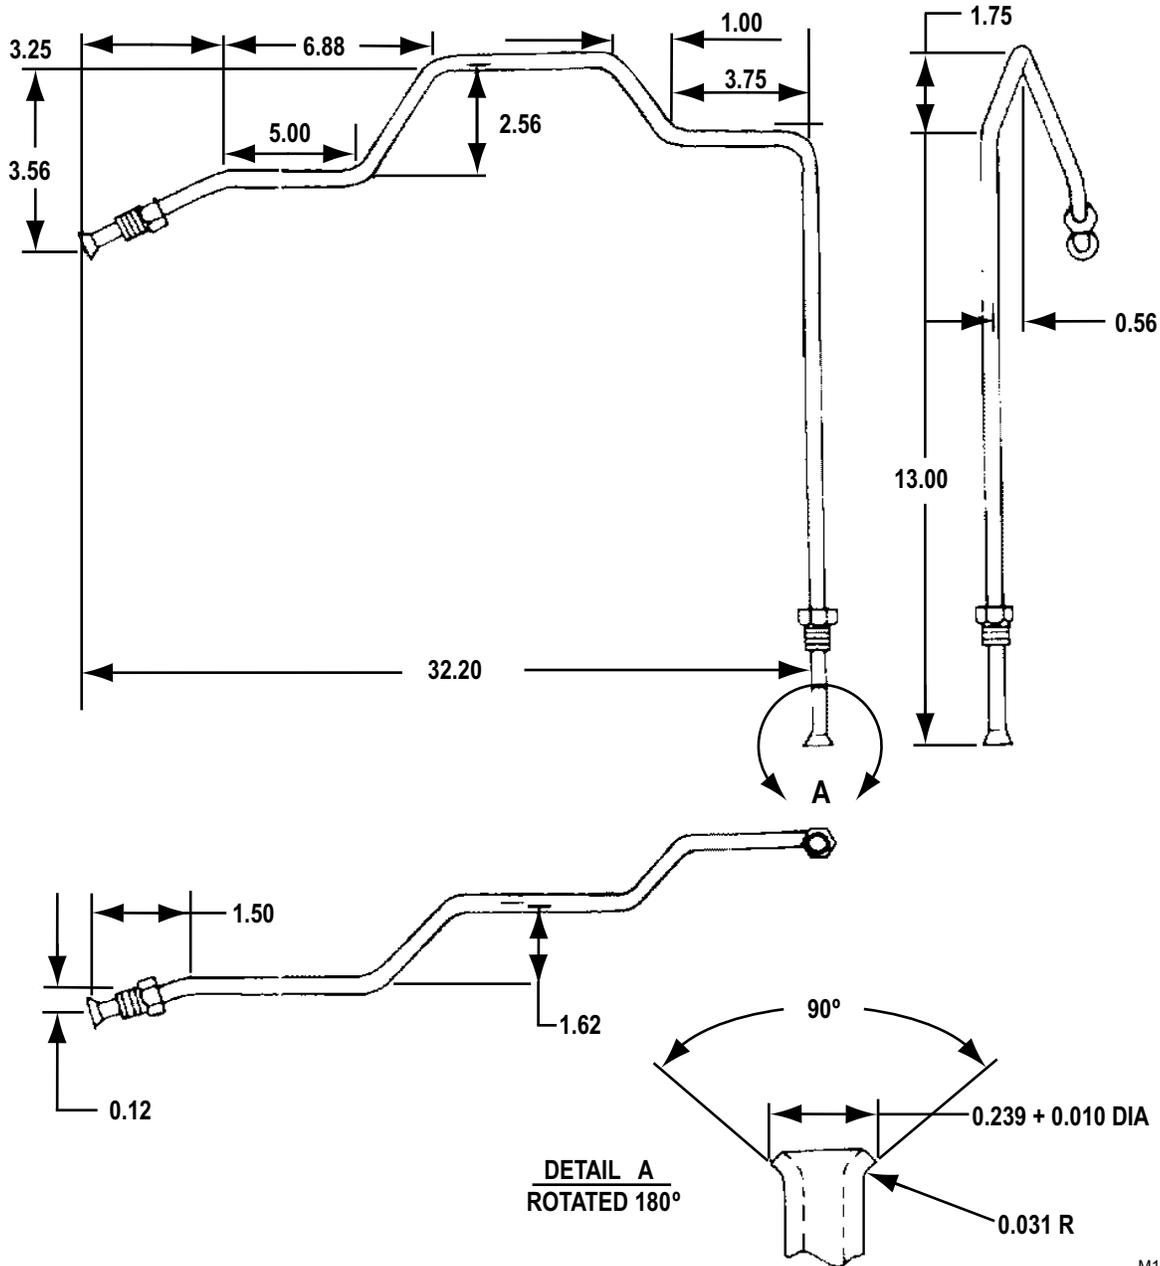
Front Hydraulic Brake Tube Assembly (M101A3 and M116A3).
